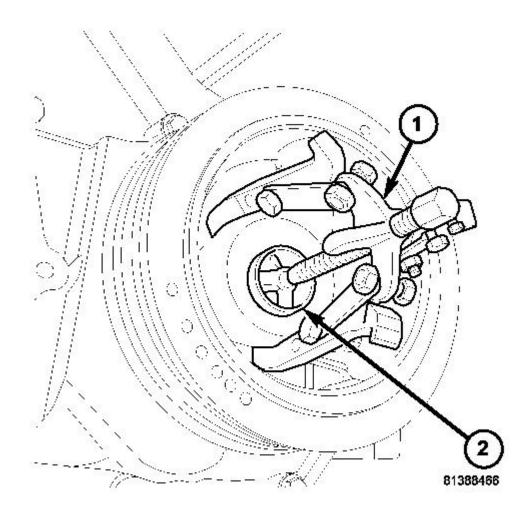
Crankshaft Damper Removal Courtesy of CHRYSLER LLC
